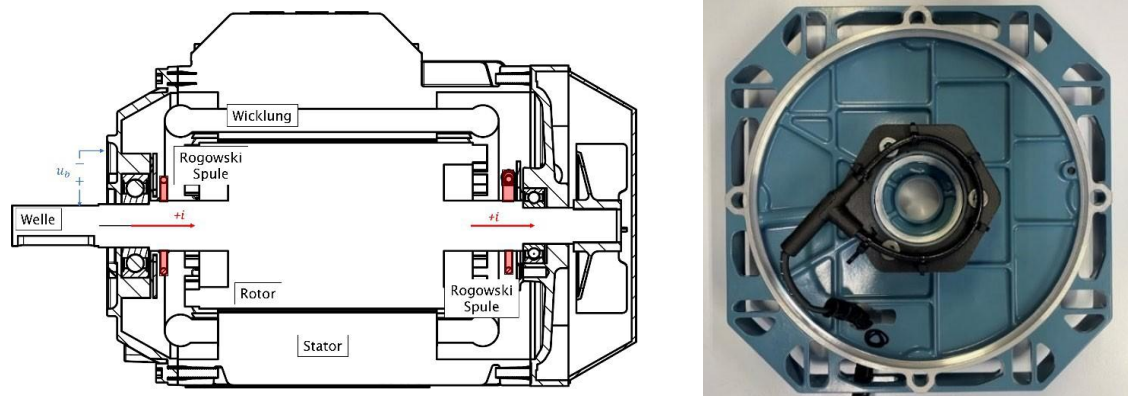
Position and measuring direction of the installed Rogowski coils as well as a detailed view of the installation of the Rogowski coil on the rear bearing shell.
